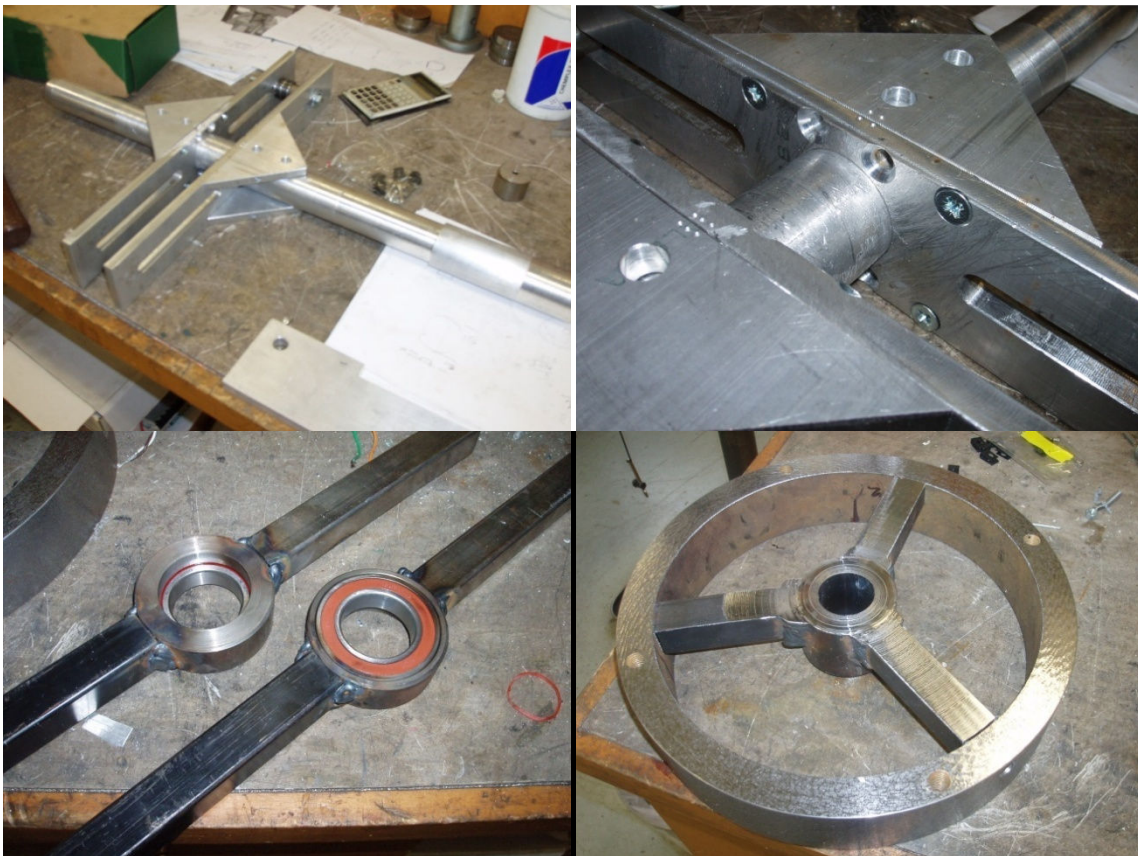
(From top left) Crankshaft, attachment of cranks to shaft, stabiliser bearings and flywheel
